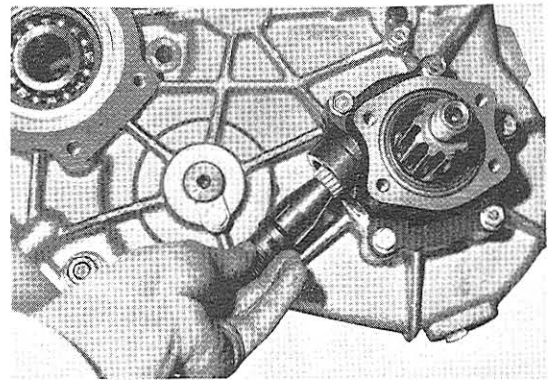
Removing Speed- V0449 ometer Shaft Sleeve Assembly
